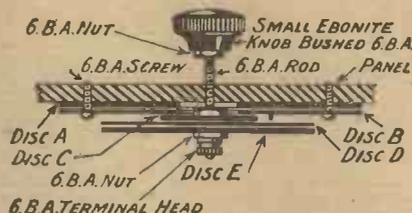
If a quicker adjustment is desired, a spindle of larger diameter than 6BA may be used.
